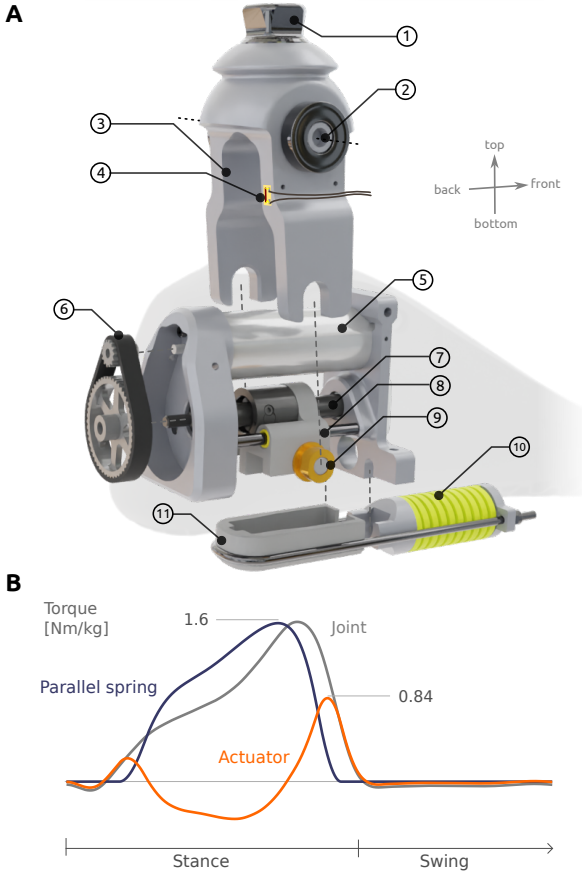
A Exploded view of the device: (1) pyramid connection, (2) joint axle with magnet for position measurement, (3) main lever, (4) strain gauge for torque sensing, (5) motor, (6) belt-pulley transmission unit, (7) ball screw transmission, (8) slider, (9) pin joint, (10) die spring, (11) spring transmission and mechanical stop. B Joint torque split between the ideal spring and motor contributions, according to [29].
